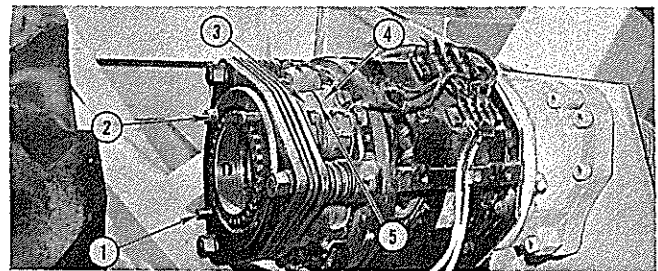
MOTOR BRAKE ADJUSTMENT
